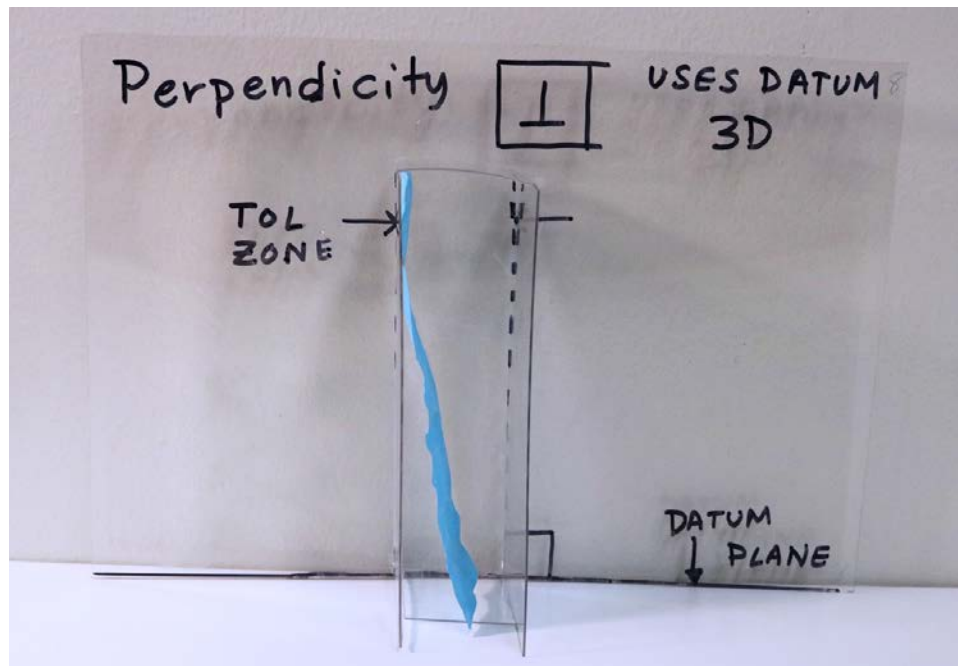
GD&T Spatial Learning Tool for Perpendicularity Tolerance
